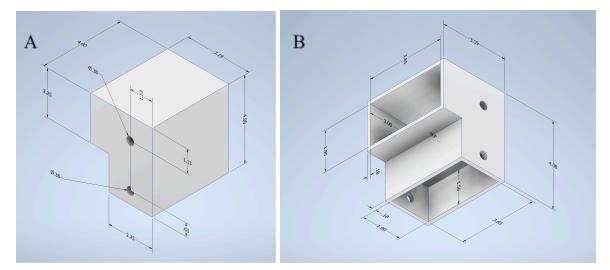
Connector Joint. Inventor Drawings by Lydia Miller and Jacob Schwartz. All dimensions are in inches.
